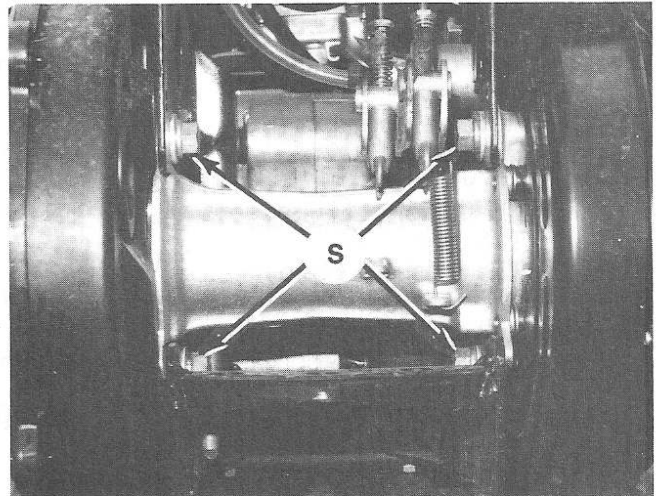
Loosen rear axle housing retaining screws (S) for chain adjustment on later models.
